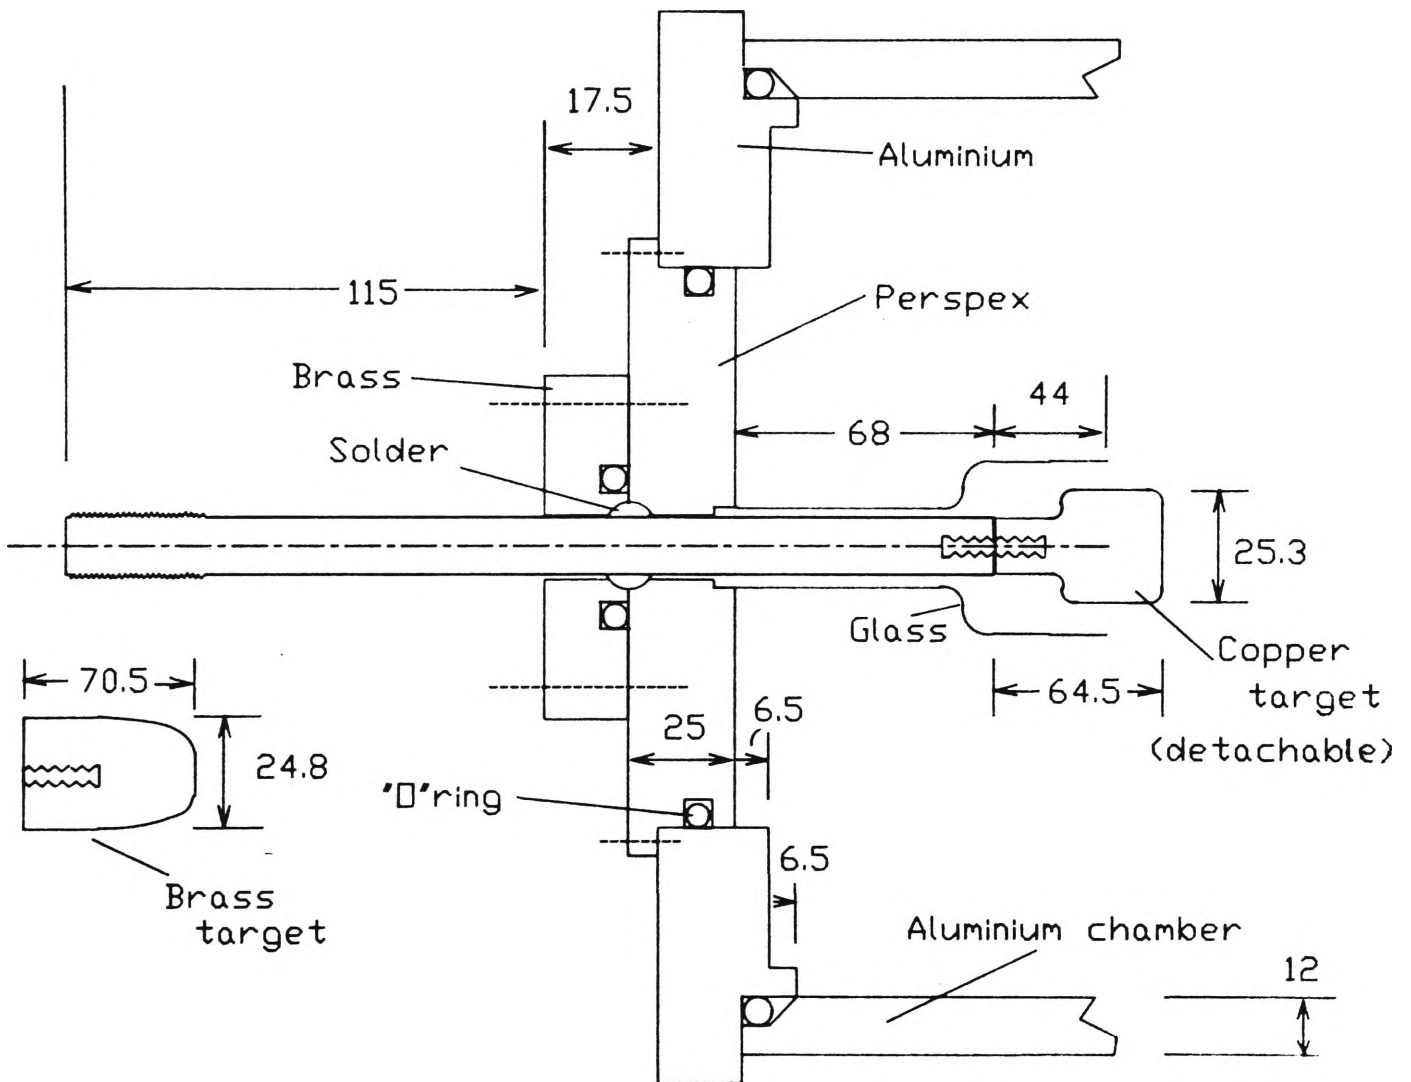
Sectional view of the electrode and end flange used for laser triggering
